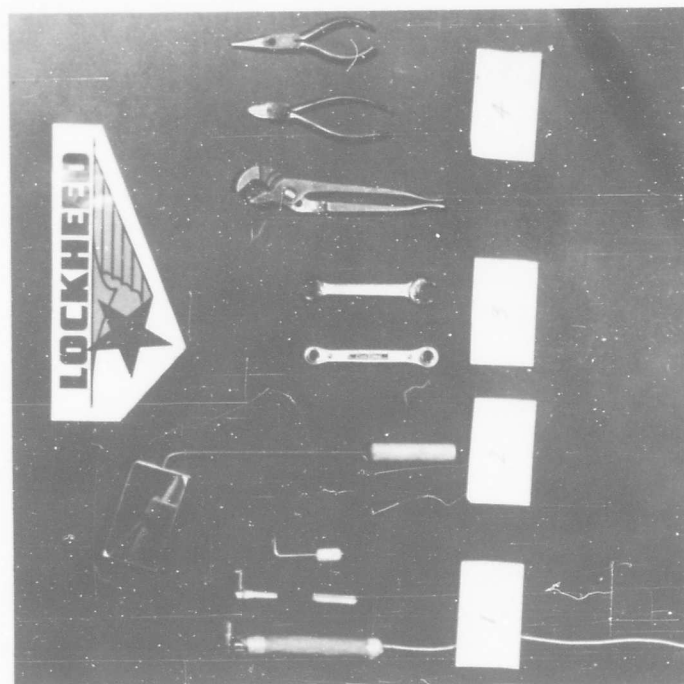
TOOLS FOR ENGINE IGNITER GASKET REPLACEMENT
